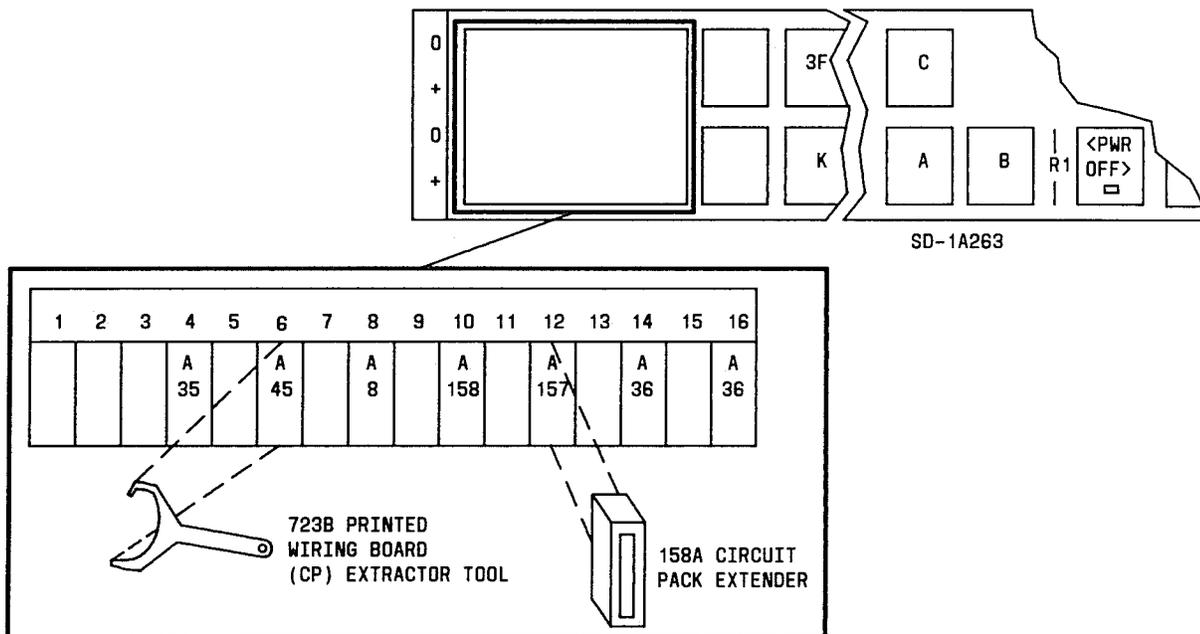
Touch-Tone Detector Test Circuit, 158A Extender, and 723B Tool
